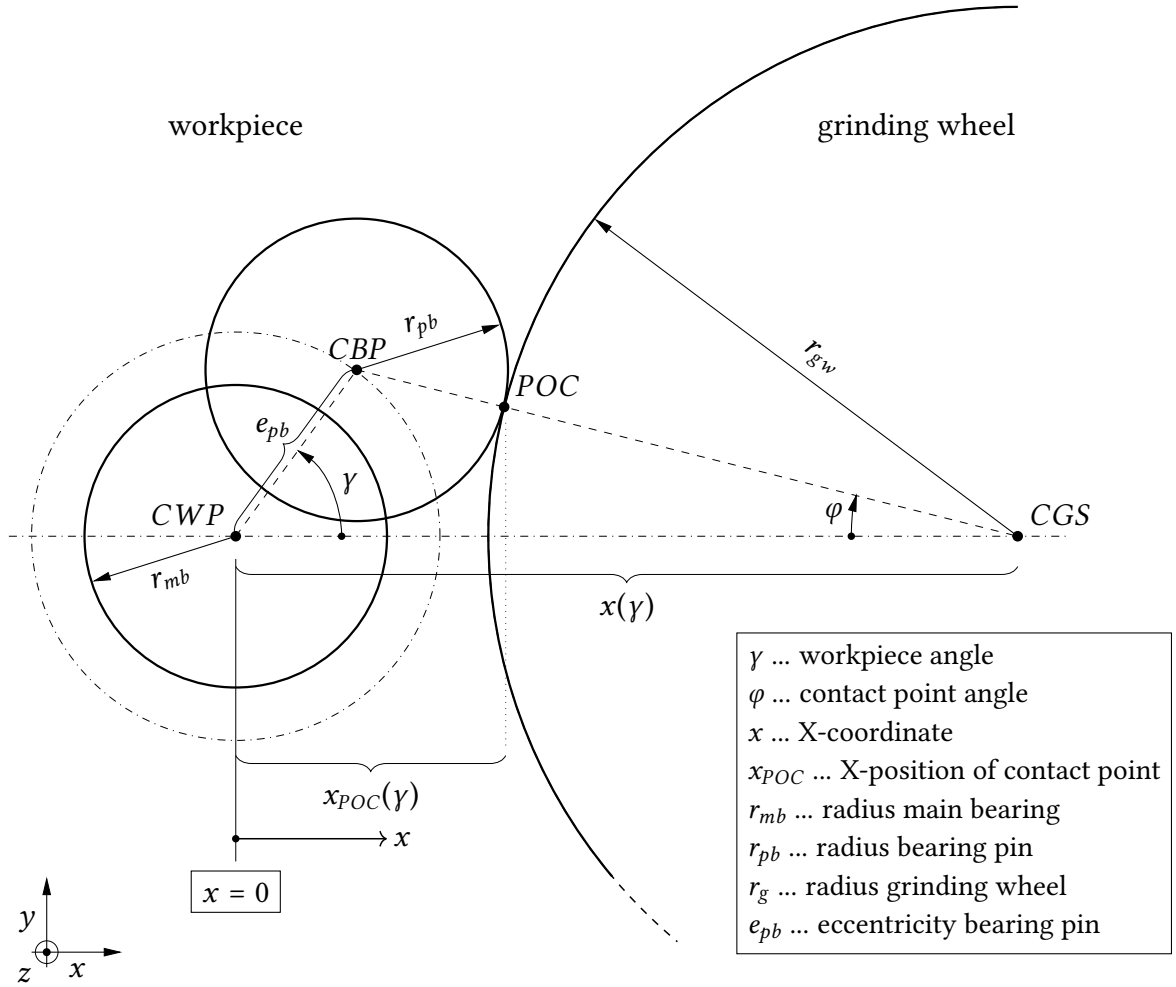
Geometric properties for the pin-chasing process,
